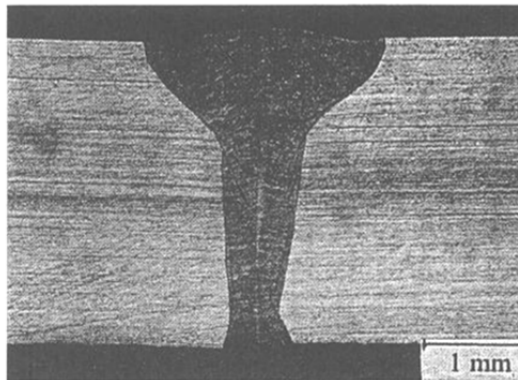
A cross section of type 304L stainless steel weld made using $P=4\text{kW}$, $S=3\text{m/min}$, $D_d=0.0\text{mm}$.
